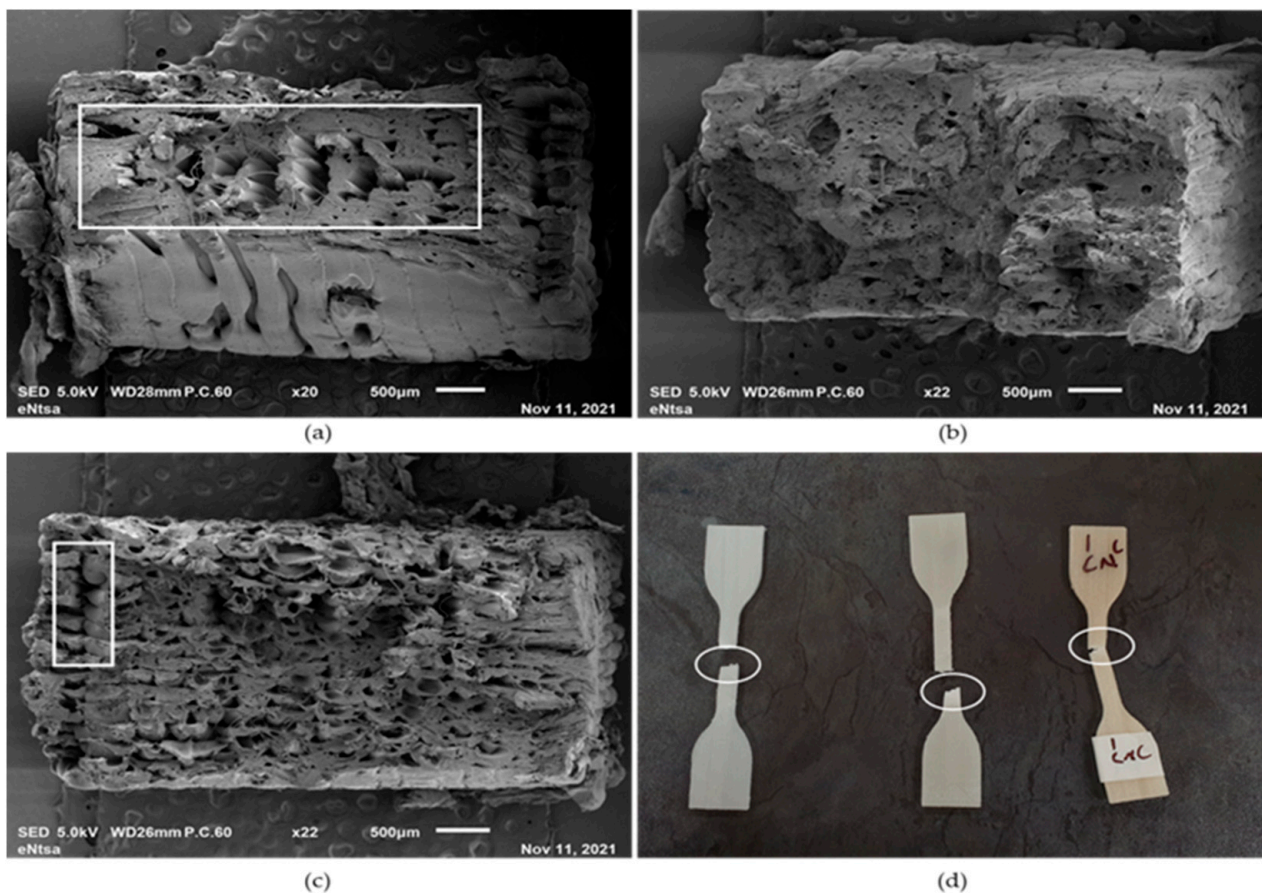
Morphology of tensile fracture surfaces of 3D-printed specimens: (a) PLACNC_{0.1%}, (b) PLACNC_{0.5%}, and (c) PLACNC_{1%} specimens, and (d) shows the interlayer fractures of the tensile specimens.
